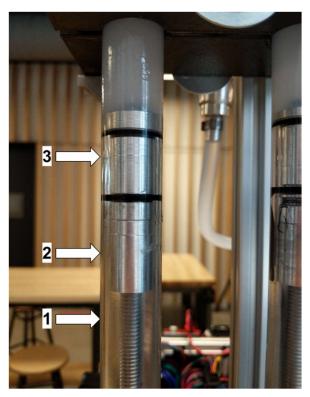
Shown above is the piston head and coupling. The piston head (#3) features two O-Rings which seal against the inside walls of the cylinder. As the piston advances this displaces silicone from the cylinder, towards the end effector. The coupling (#2) sits below the piston head, flush against it. Its purpose is to allow for angular and axial misalignment between the threaded rod (#1) and piston head. It also prevents the piston head from rotating with the threaded rod, constraining its movement to translation within the cylinder.
